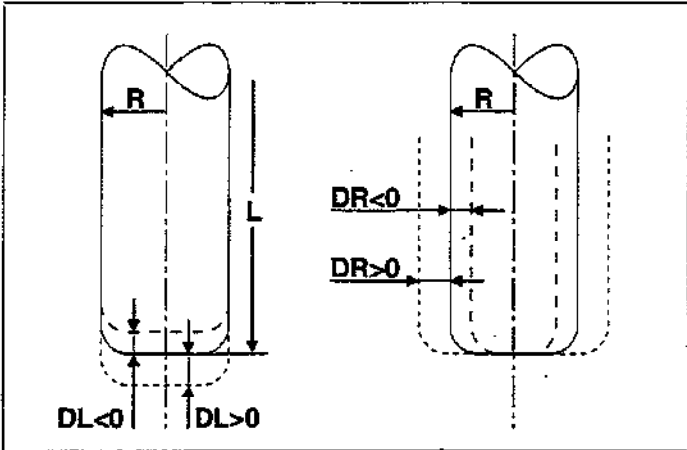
Oversizes DL, DR on a toroid cutter
